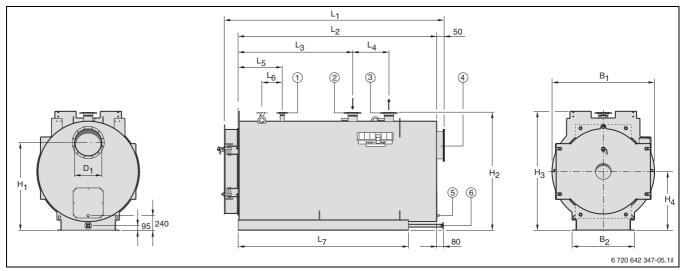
Dimensions Logano S825L LN, boiler sizes 4250 to 17500 (dim. in mm)
